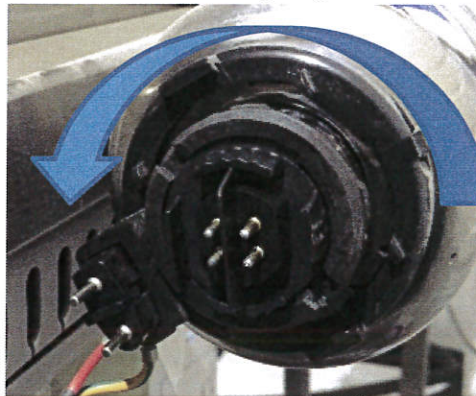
Removal of Sleeve, Note: The sleeve can be removed with or without the UV Bulb in place.
